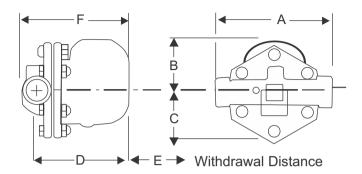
Dimensional Drawing of SOFT31 screwed ends
